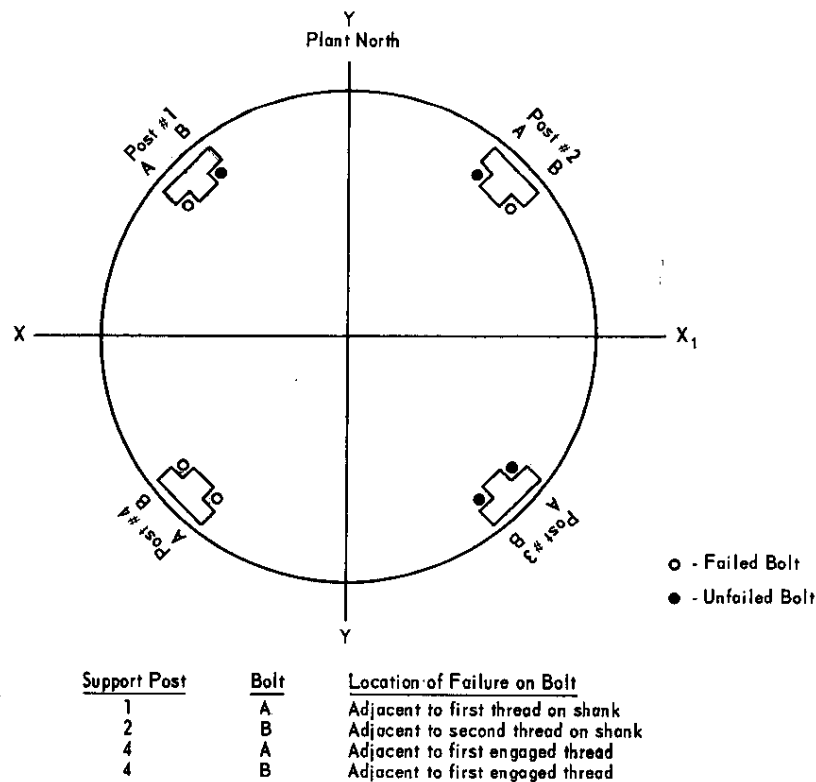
POSITIONS OF BROKEN 5/8-INCH BOLTS
